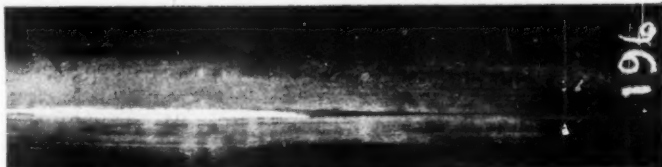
Sharp-bottomed plug score of type which causes failure.
